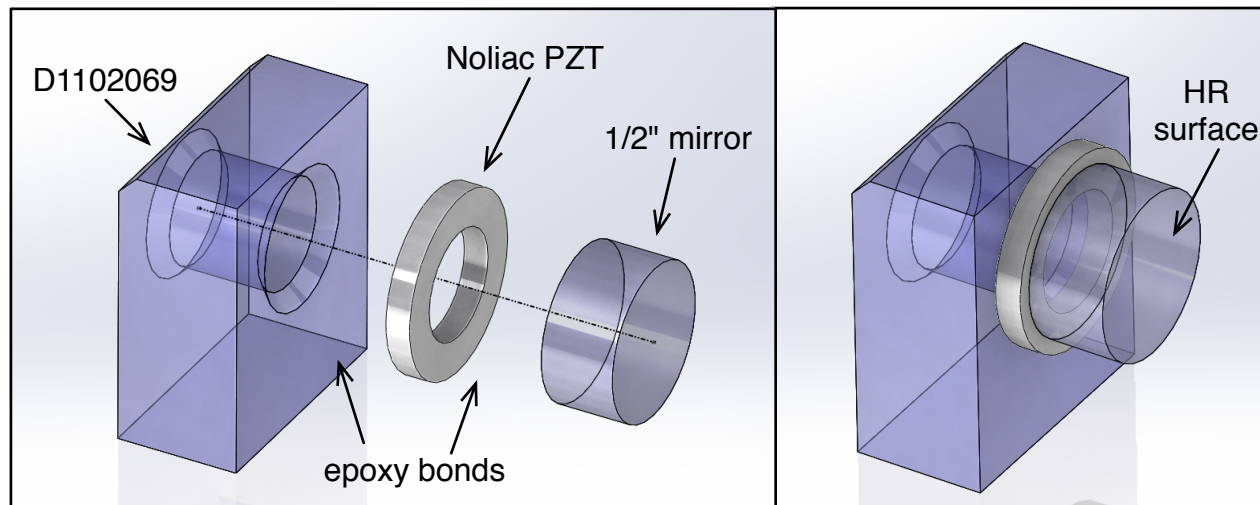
PZT actuated mirror mount (exploded view on left, final assembly on right). The PZT wires (not shown) are soldered to the edge/barrel of the PZT ring (solder composition: Sn96.5/Ag3.0/Cu0.5). The bottom edge of the mounting prism (D1102069) is bonded to the fused silica breadboard.
